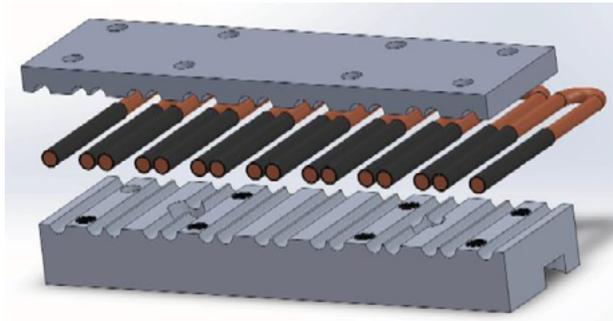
3D Drawing of the fixture assembly with U-shaped joints wrapped with black rubber sheet.
